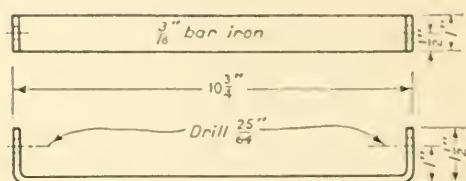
Special brace for special chain board, Case-Osborne corn binder
